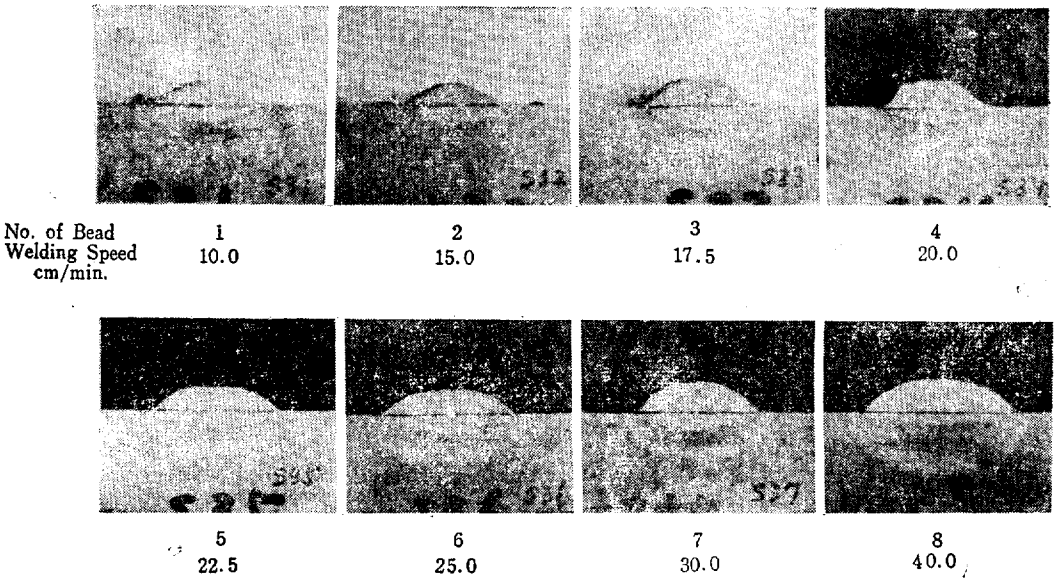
Macro pictures showing different penetrations by different welding speed (2×).
